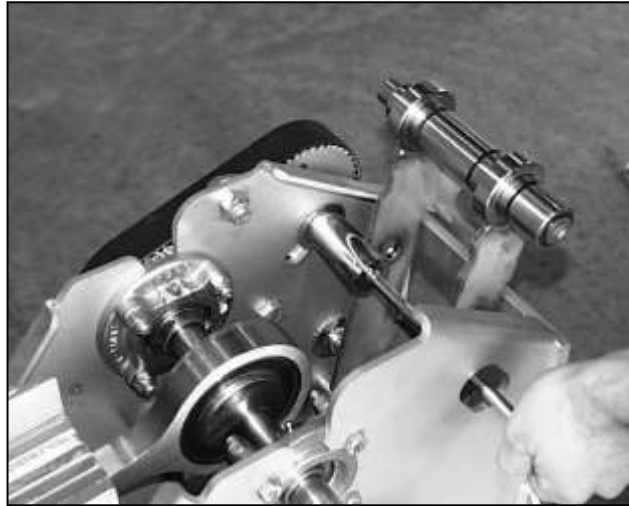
Tightening the Tensioner Sprocket Bolt
